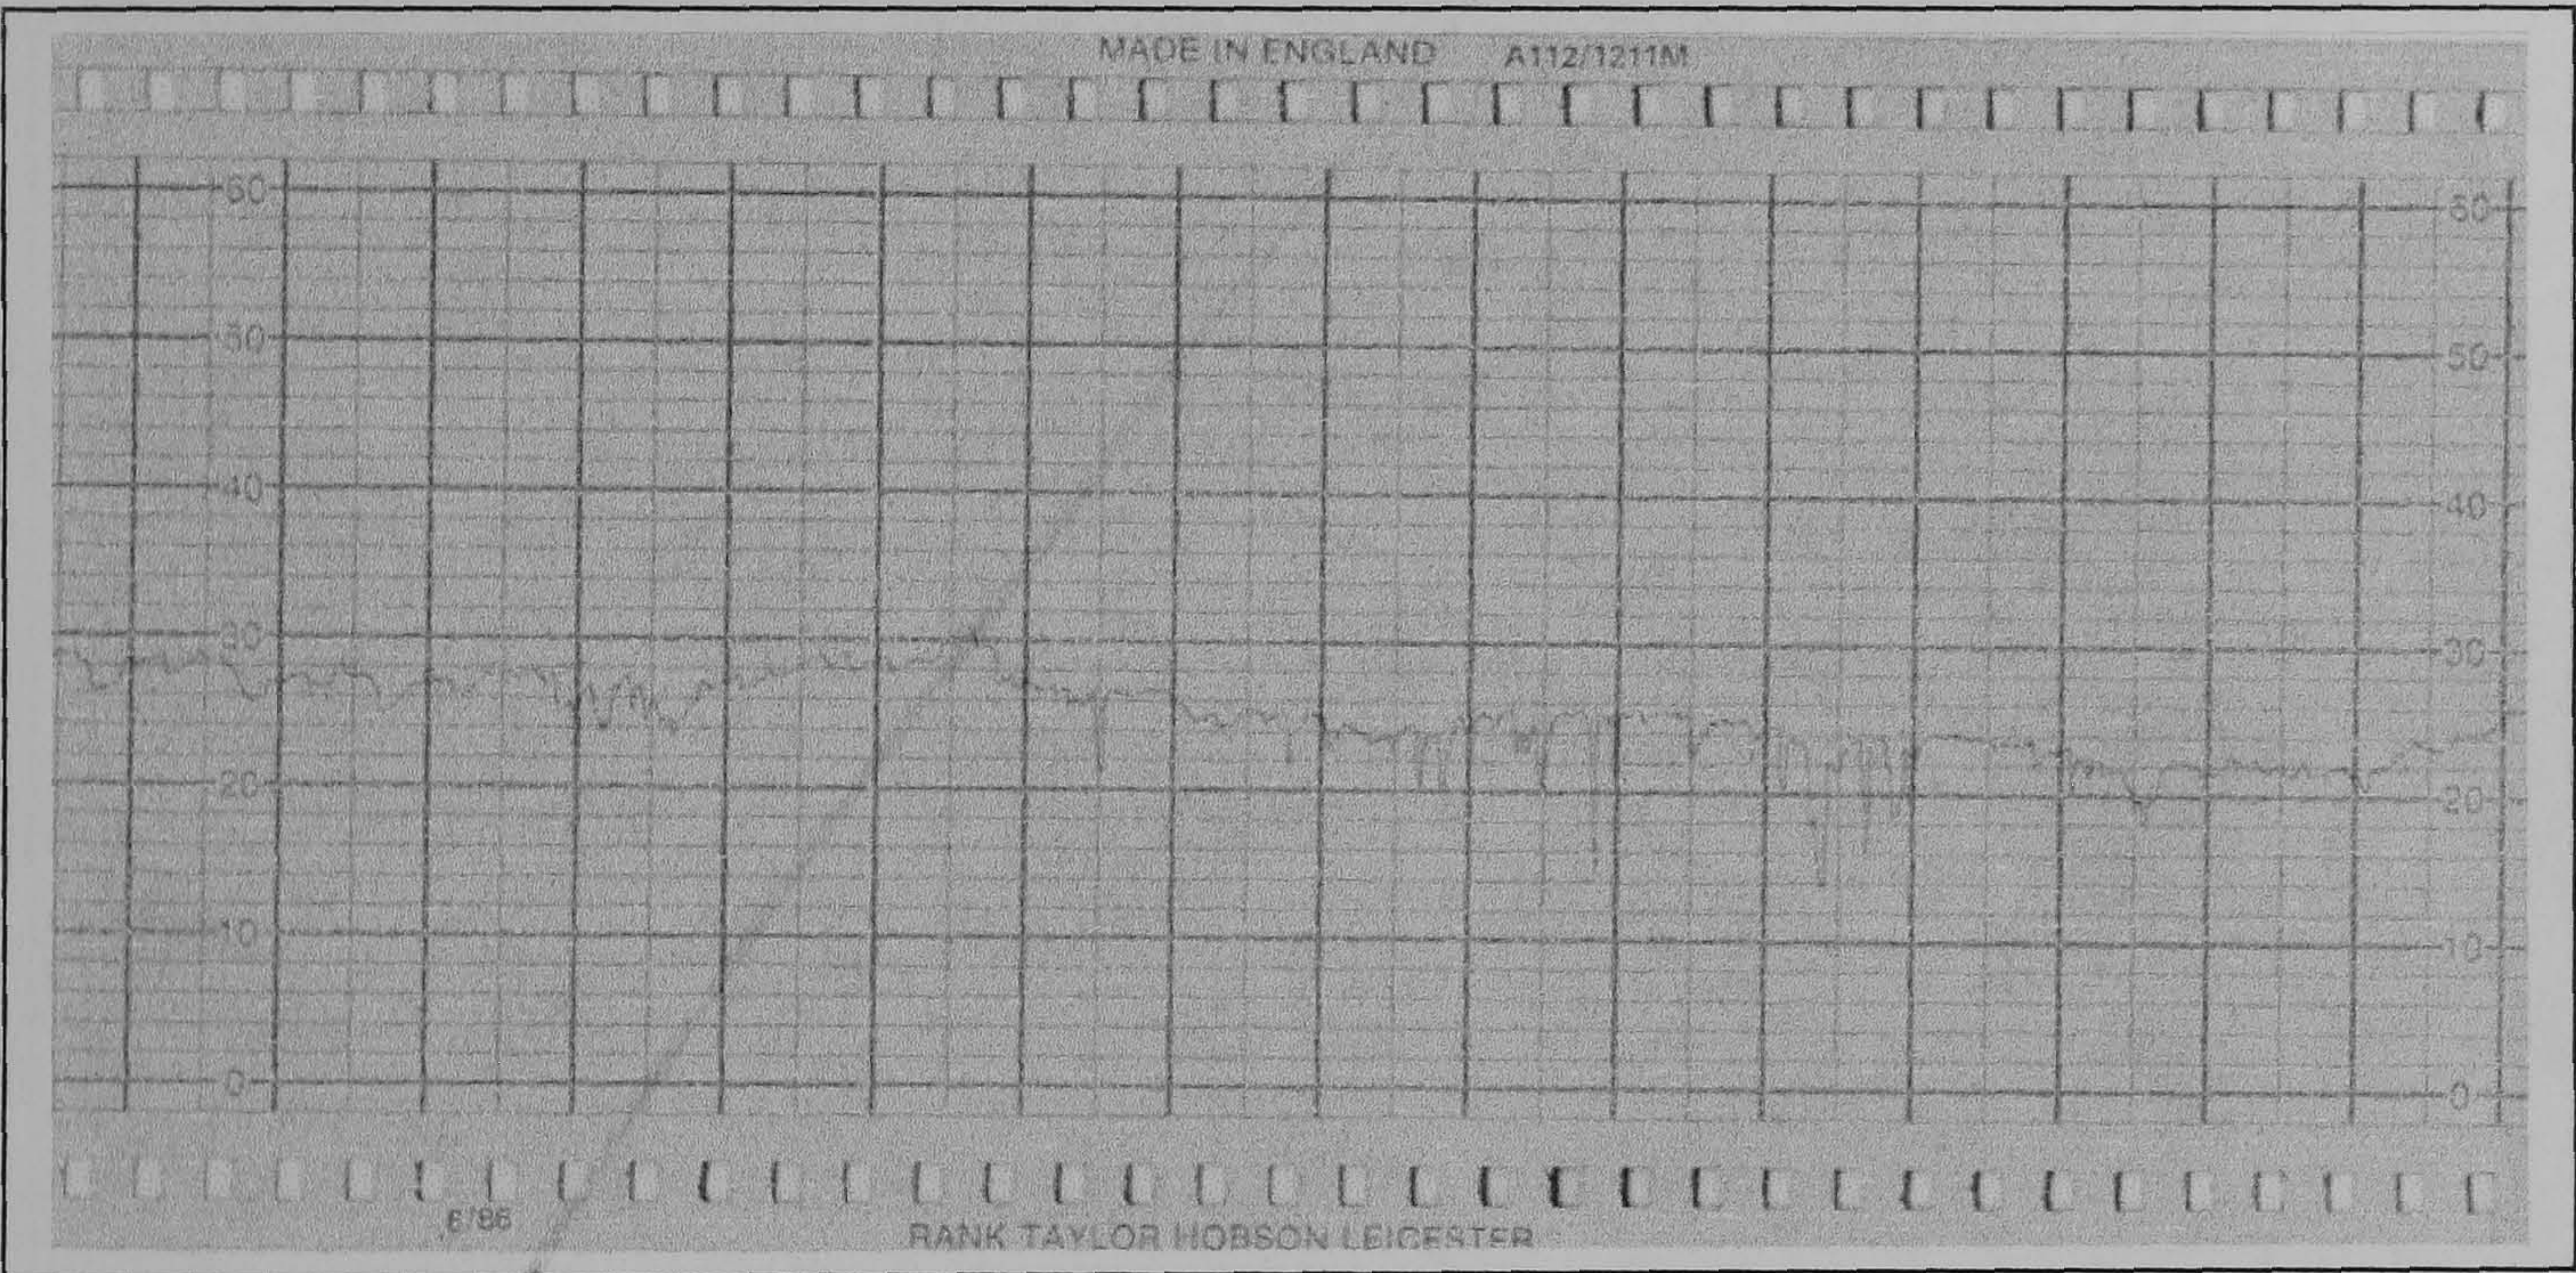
Surface profile of poorly machined bearing in the direction of grinding
